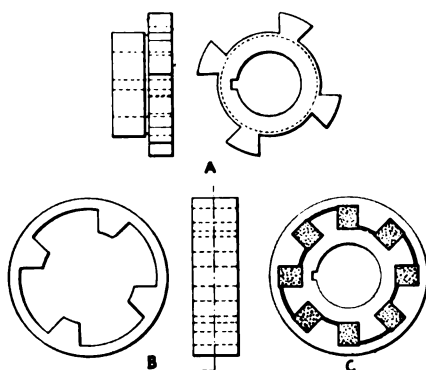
This coupling uses standard hydraulic packing for the resilient material.
